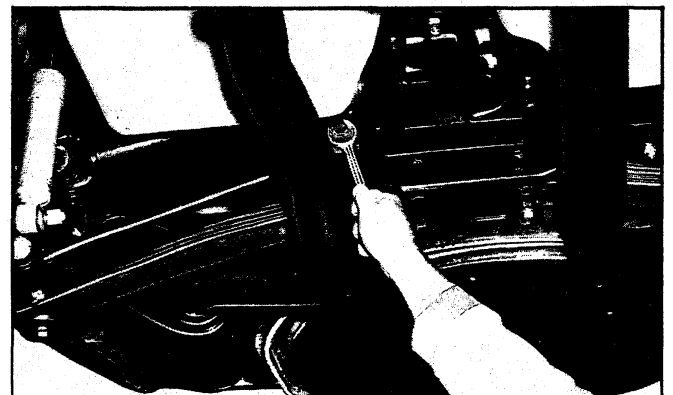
Adjusting Rear Wheel Camber (Corvette)
